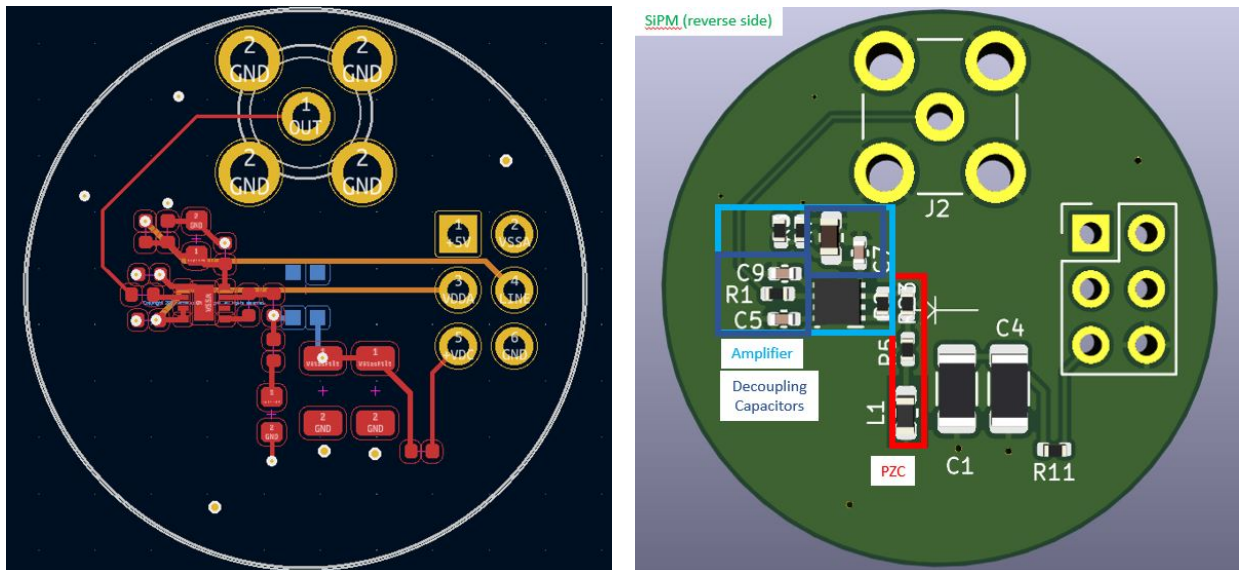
PCB design in KiCAD (left). Front transmission lines in red, back in blue, power layer in gold. CAD model of PCB in KiCAD (right). Hamamatsu S14160 SiPM mounted on reverse side.
